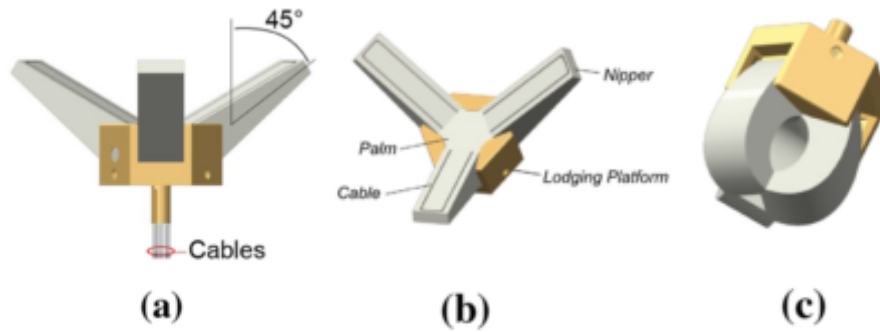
Elastomeric soft gripper. (a) Front and (b) isometric view in open configuration; (c) isometric view in close (Rateni, G., et al., 2015).
